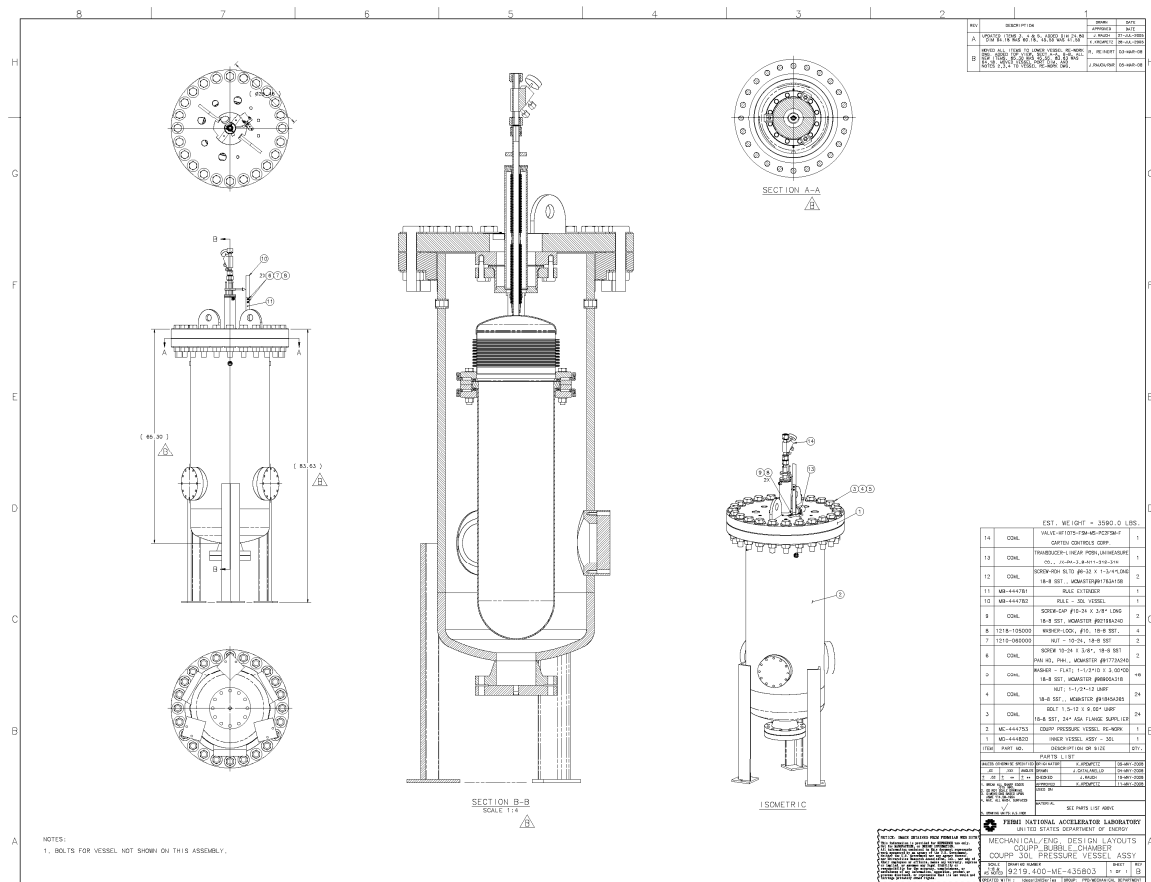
Engineering drawing of inner bubble chamber and Outer Vessel.
